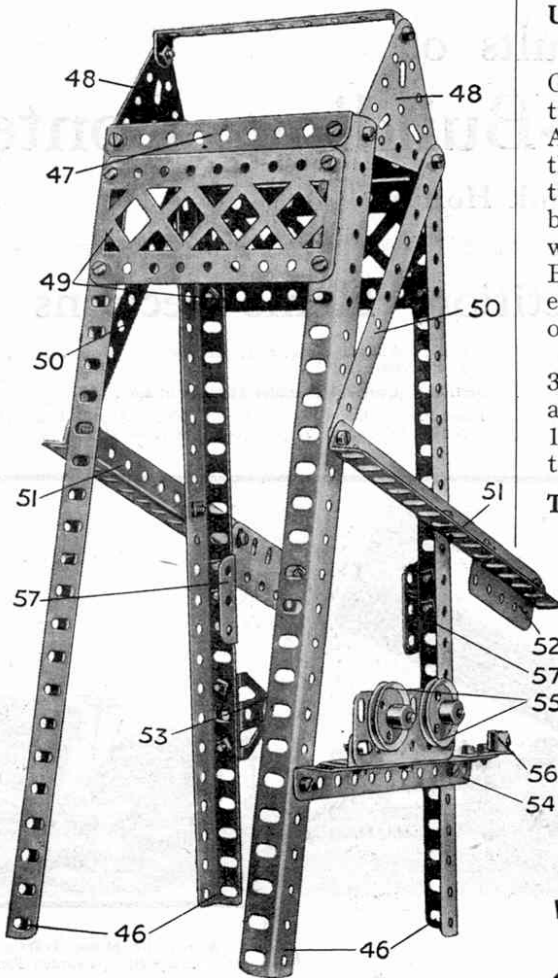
Upper Portion of Tower, with Gearing and Mechanical Details, etc., removed
